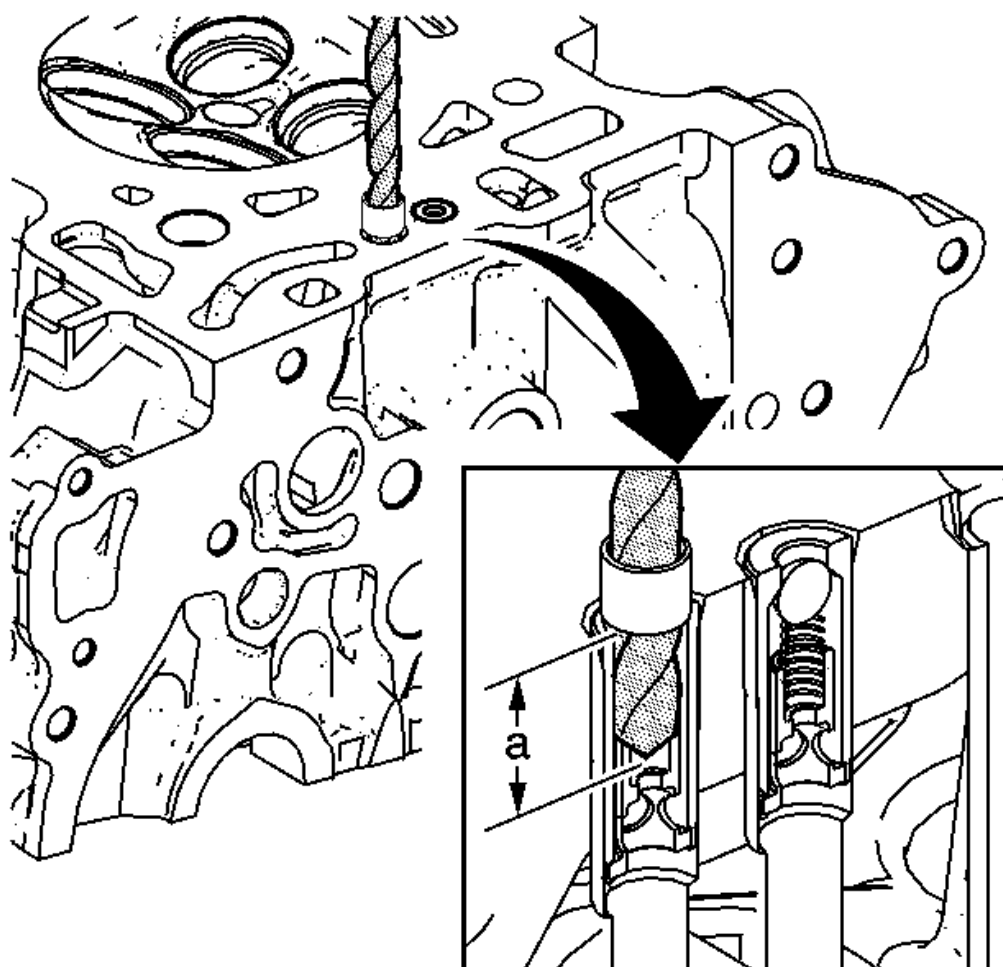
Drilling Out Top Portion Of Check Valve
